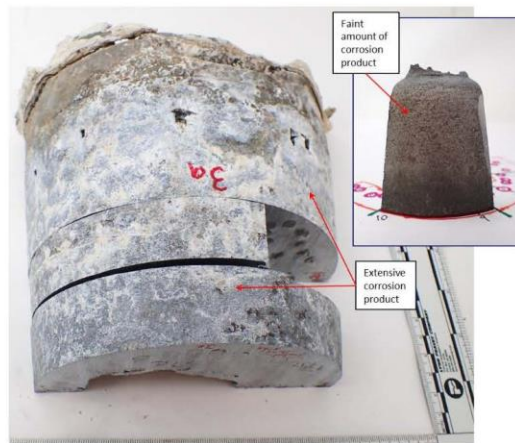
Outer diameter of the 3 o'clock side of the zinc casting (slices 3a, 3c, and 3e). Inset is the outer diameter from a piece of the zinc casting removed from 9g, between 9 and 10 o'clock.
